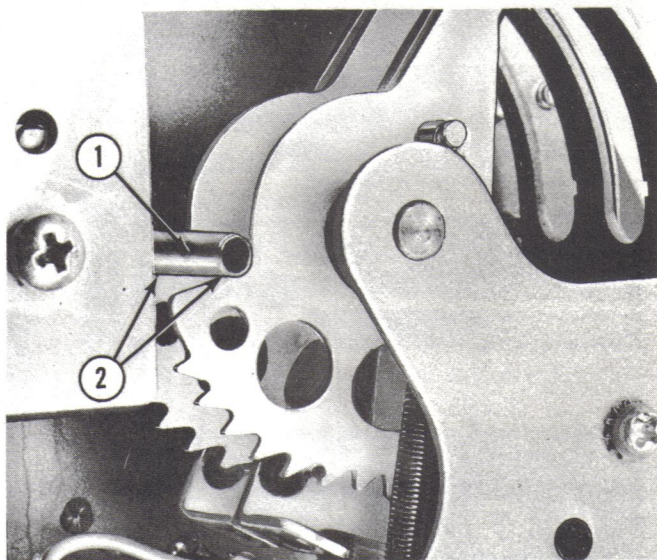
STOP LEVER AND QUADRANT INDEXING STRIP ADJUSTMENT
